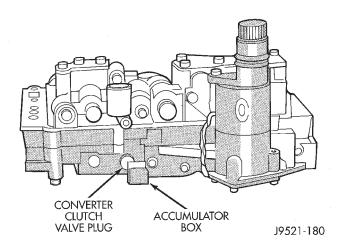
Seating 3-4 Accumulator On Lower Housing VALVE BODY FINAL
